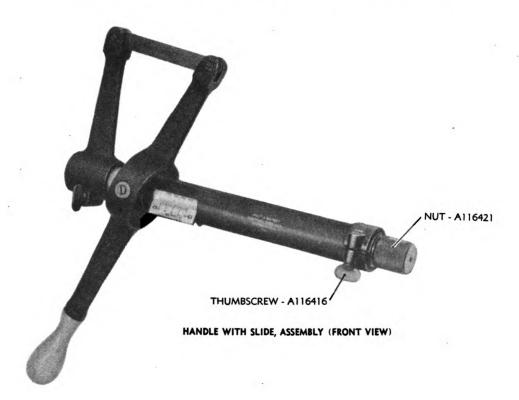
Handle, with Slide, Assembly (5.75-inch Star Gage)
